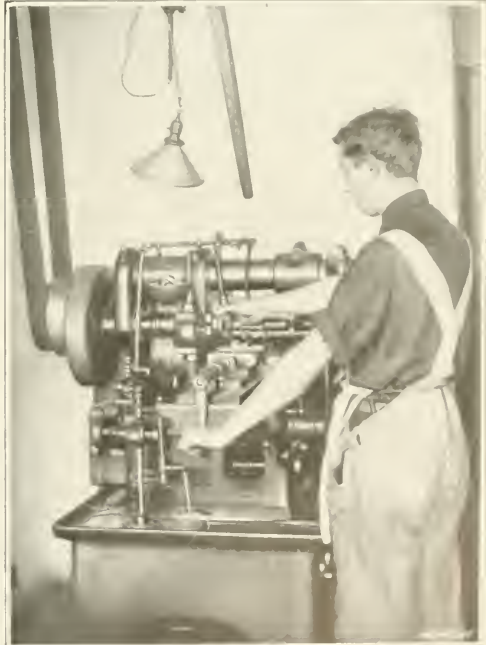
Milling Machine provided with Auxiliary Exhaust Tube for supplying Flow of Cutting Compound to wash away Chips
